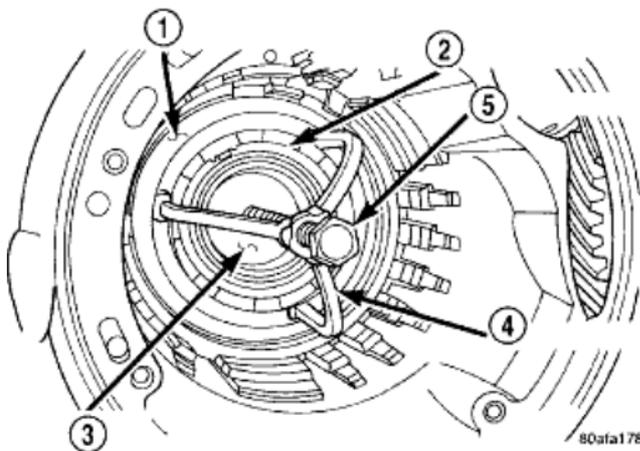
Removing/Installing Low/Reverse Spring Compressor
